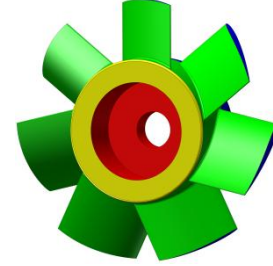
The red surface indicates the last and final CNC Mill set up and the yellow surface indicates the area which was parted off with the lathe.
